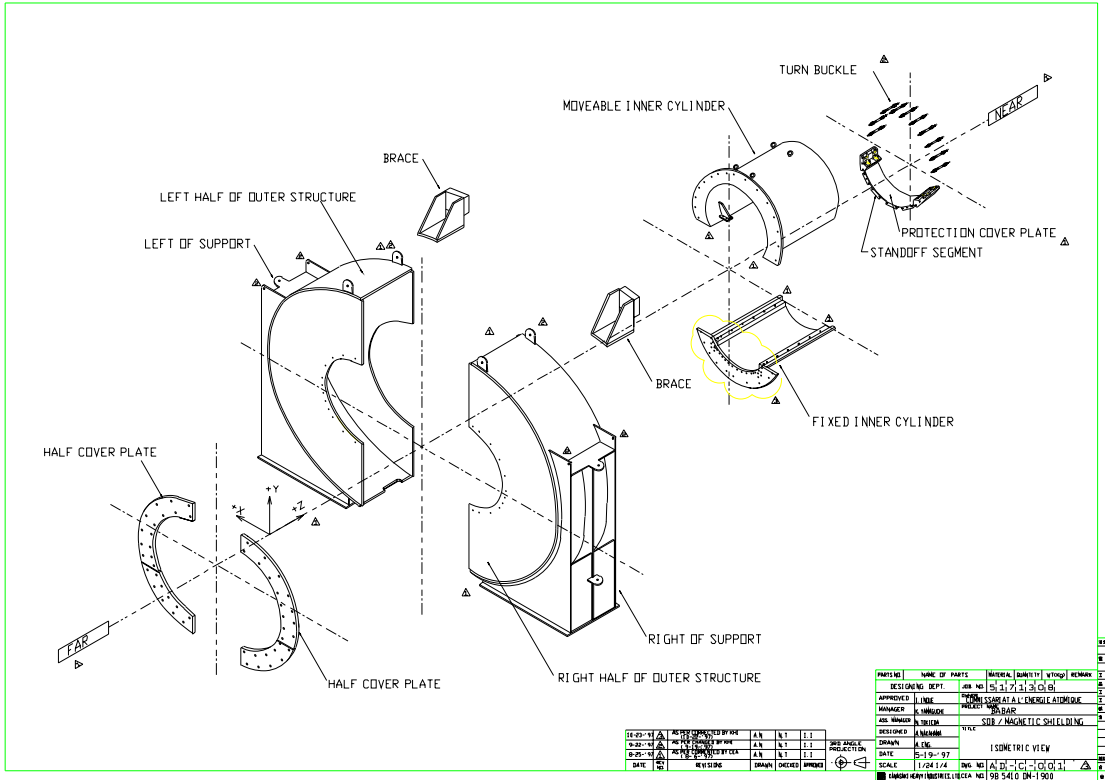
Exploded isometric view of the design of the DIRC shield design
